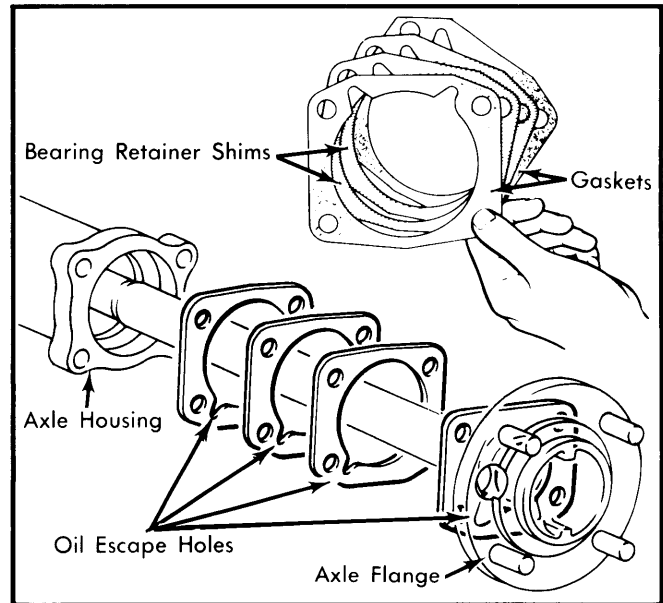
Exploded View of Axle Shaft Assembly (Passenger Car Models)
